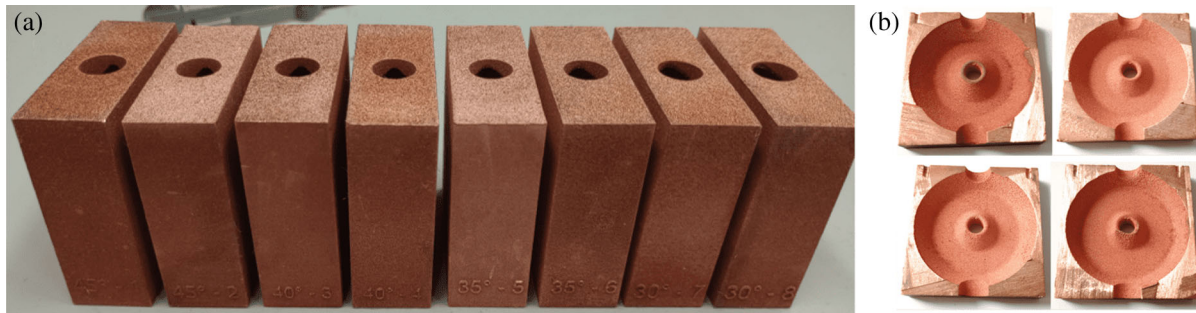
(a) Additively manufactured side-coupled linac structures and (b) half-cells after cutting [9].
